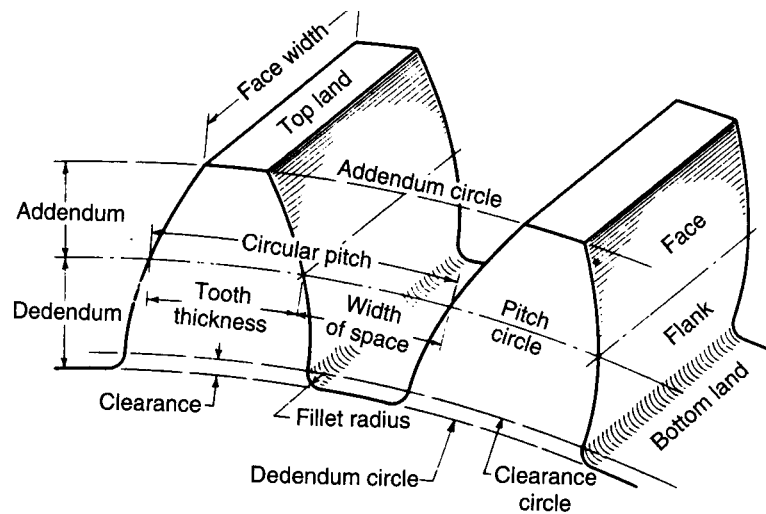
Principal gear tooth dimensions and nomenclature from *Mechanical Engineering Design*, 5th ed. (1977), by Joseph E. Shigley and Charles R. Mischke. Published by and reproduced with permission of The McGraw-Hill Companies.
